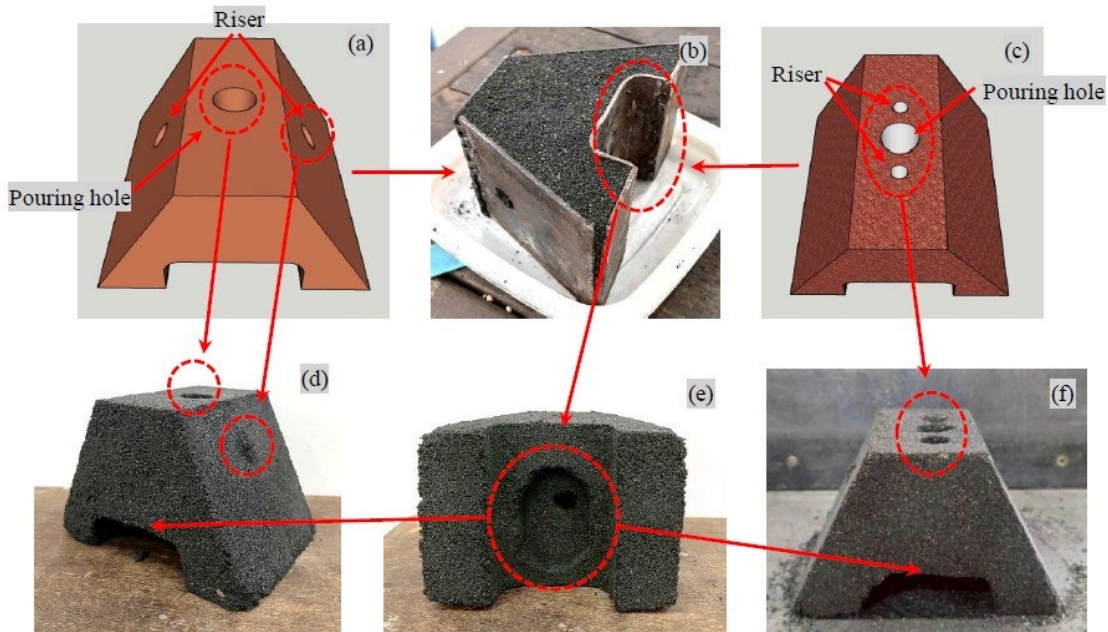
Mold design and fabrication, (a) mold type 1 design, (b) metal fabrication form, (c) mold type 2 design, (d) fabricated mold type 1, (e) bottom concave profile and (f) fabricated mold type 2.
